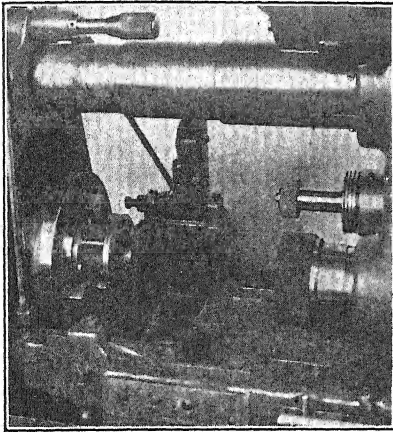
Hole and Face Grinding a Refrigerator Compressor Cylinder of Cast Iron on a Bryant No. 12-A Hole and Face Grinder in One Chucking.
